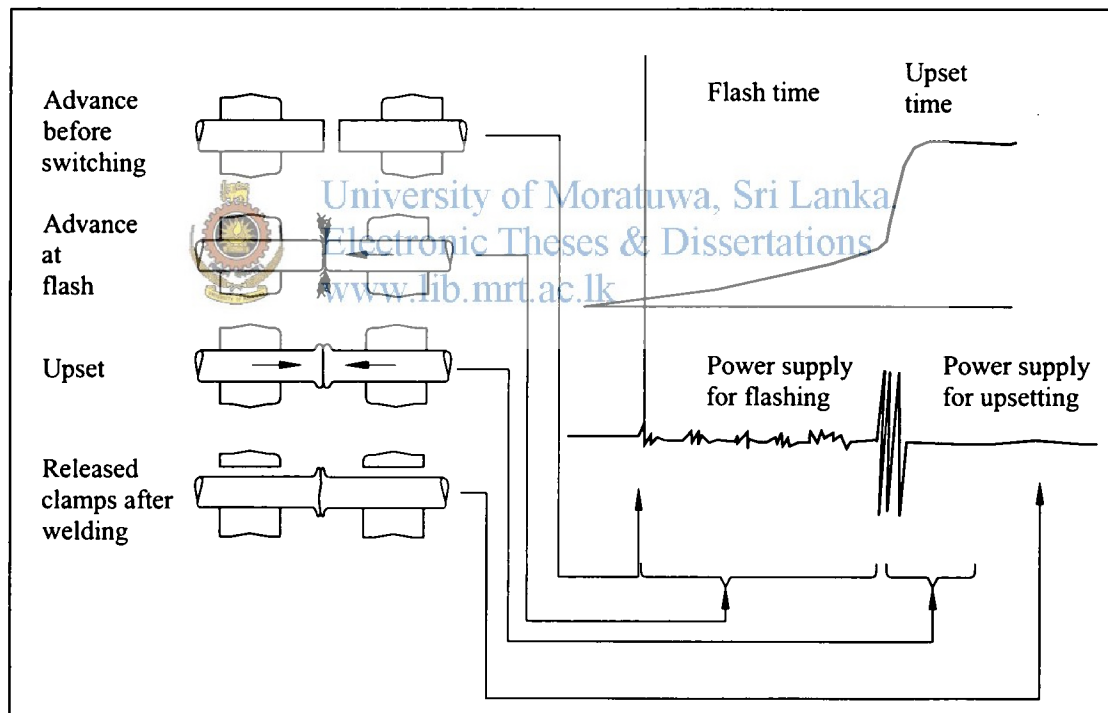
Principle of Flash Butt Welding [4]
